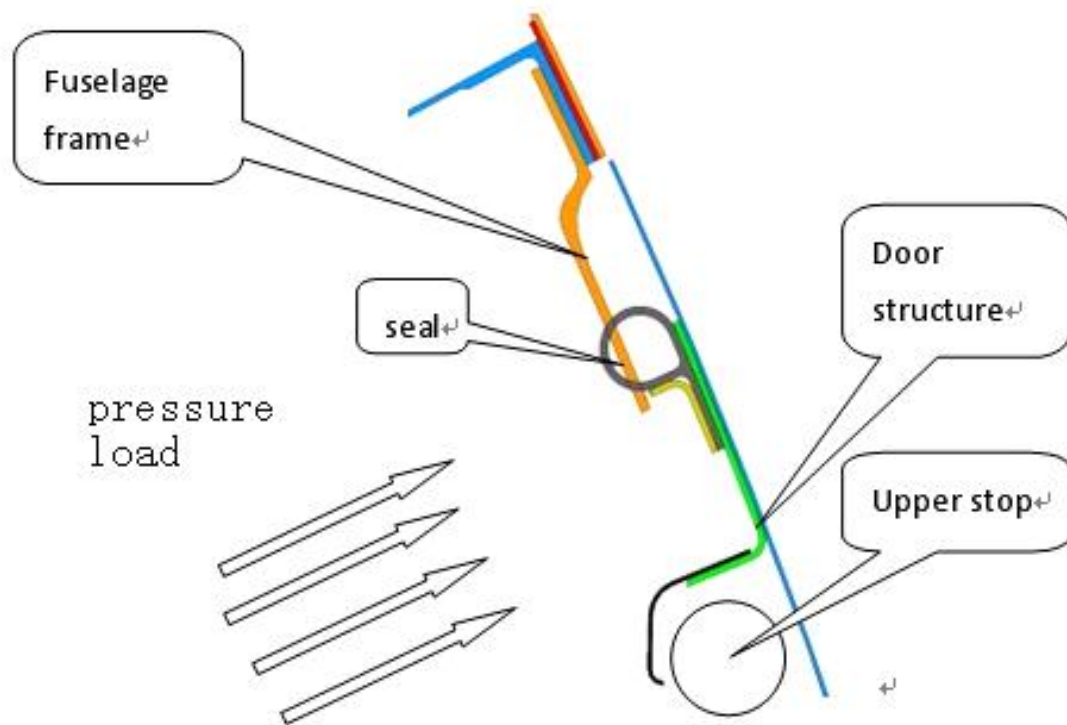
Upper Seal Type of Horizontal Slide Opening Type Doors
